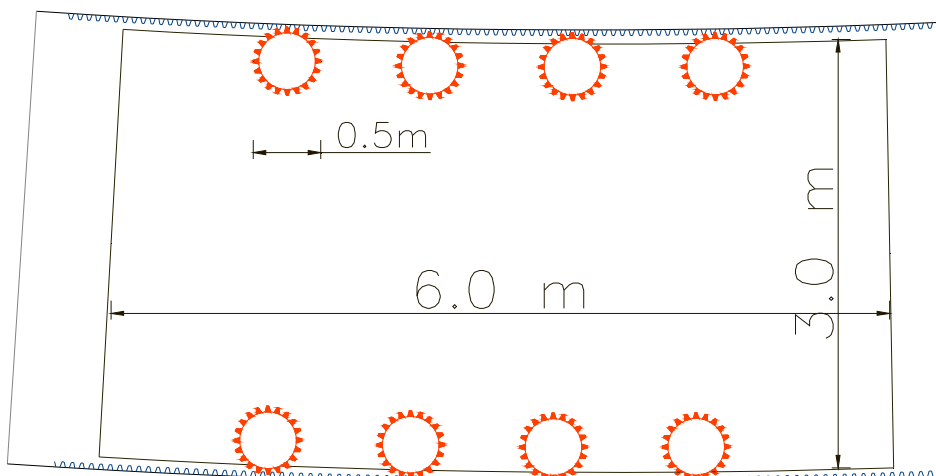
General dimensions and position of the pinions inside the locomotive (top view section)
